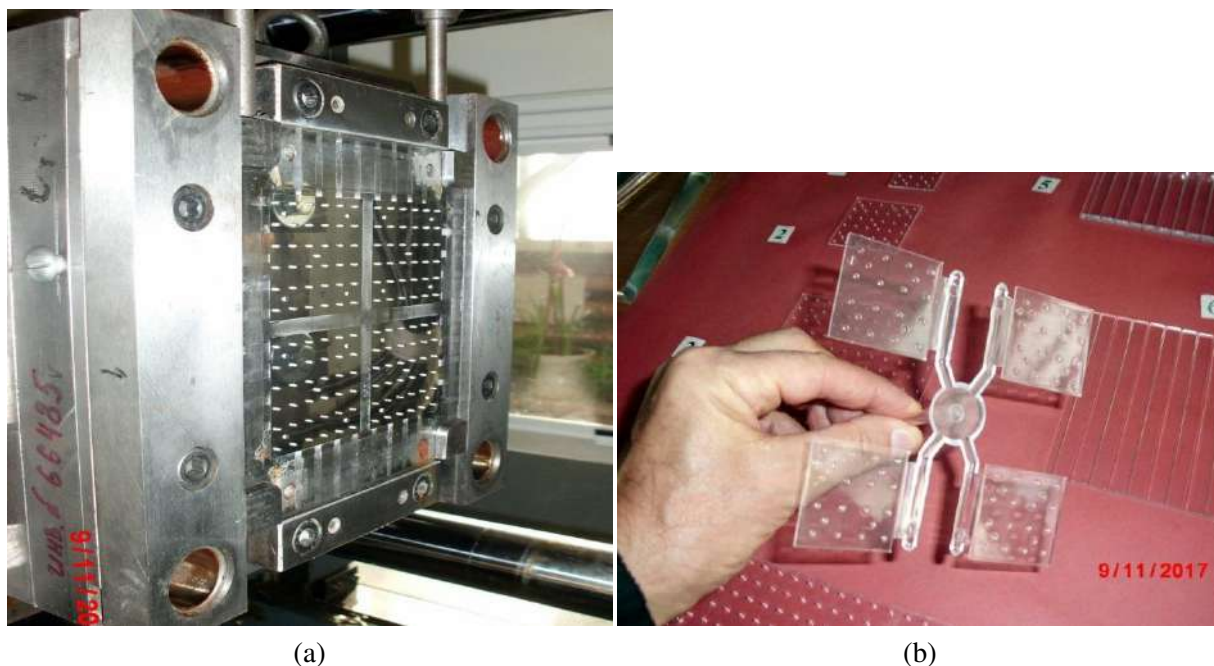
a) 4-set matrix for scintillator production; b) The scintillation plates released from the molding machine, details of the molding system are visible.
